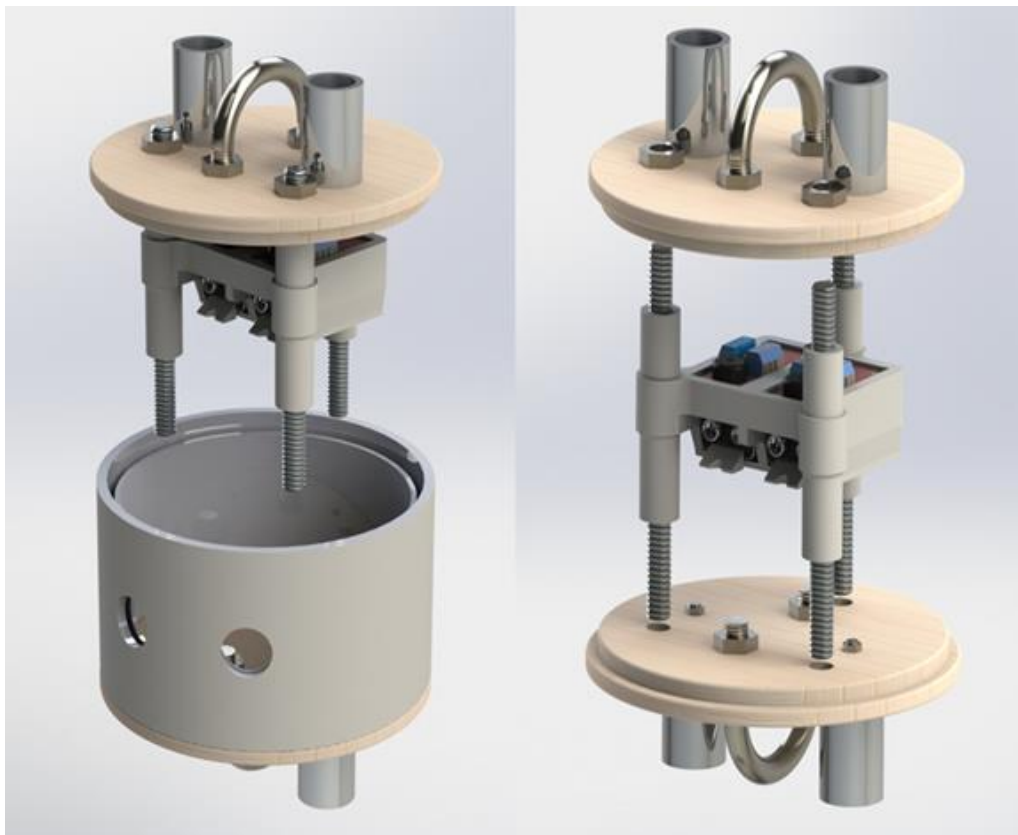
(Left) Assembly view of completed avionics bay with tubular insert (Right) Exploded view of avionics bay without tubular insert
